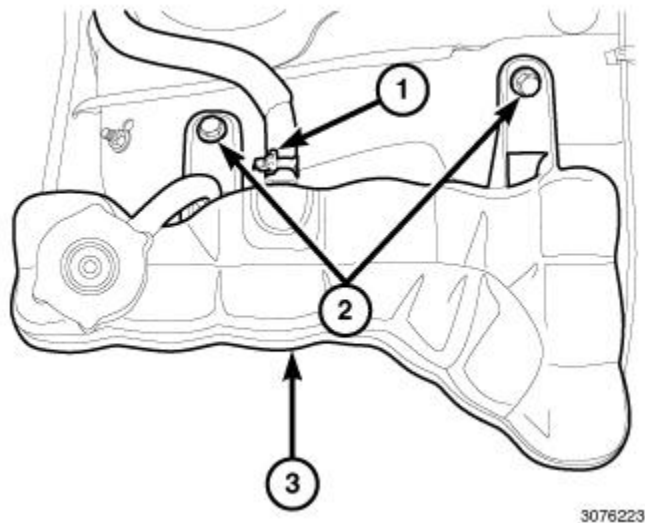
Heater Core Purge Hose, Coolant Bottle Retaining Bolts & Coolant Bottle
